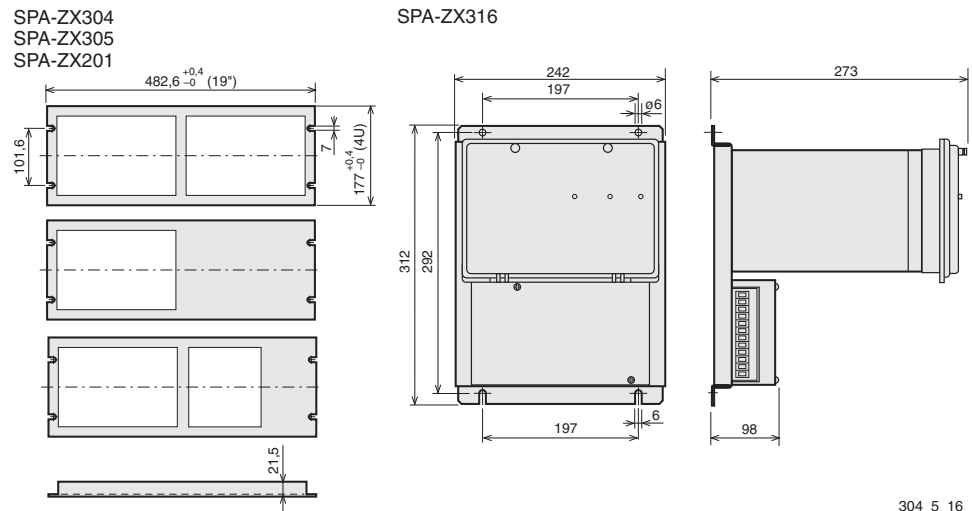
Mounting cabinets and frames as well as projecting mounting (dimensions in mm)
